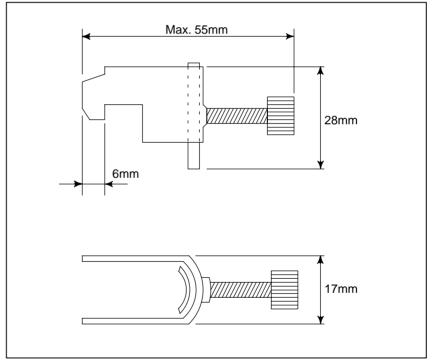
(e) Outer drawings of metal fittings for clamp
